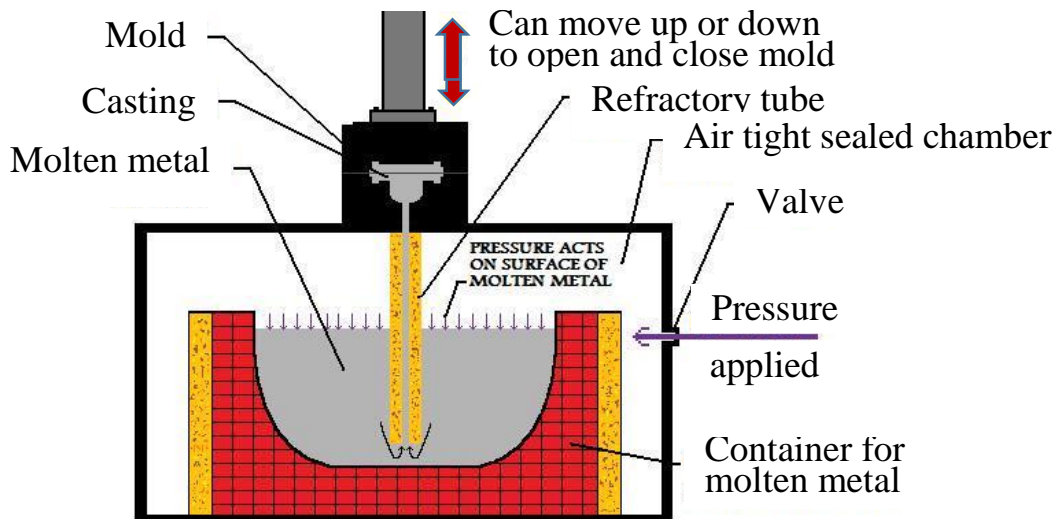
The force of the pressure causes the molten metal to fill the mold pressure is applied during the solidification of the casting
